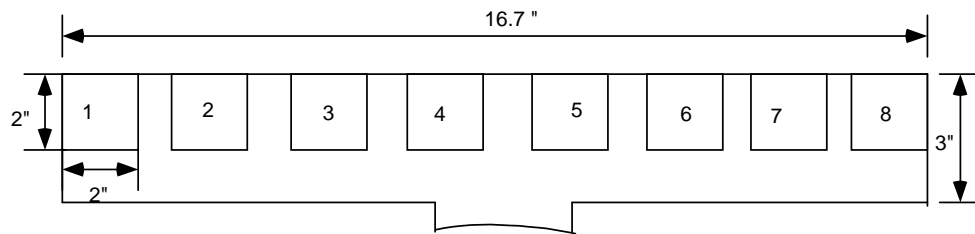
The Specimen Blank Location of Type B and Type C Specimens
